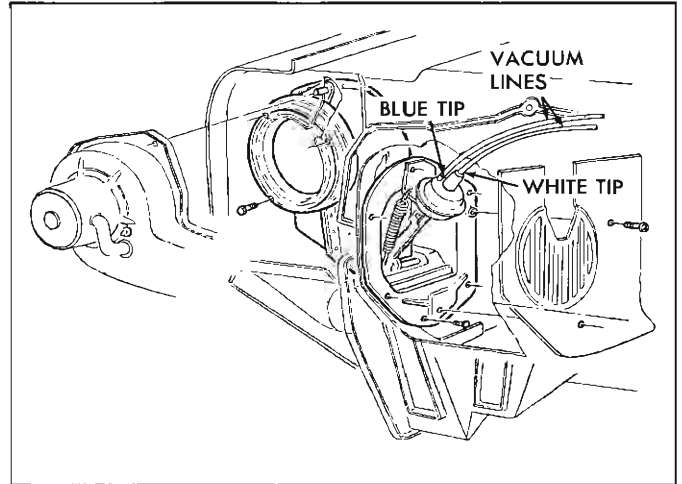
Air Inlet Assembly and Vacuum Lines (Chevrolet Four-Season System)
